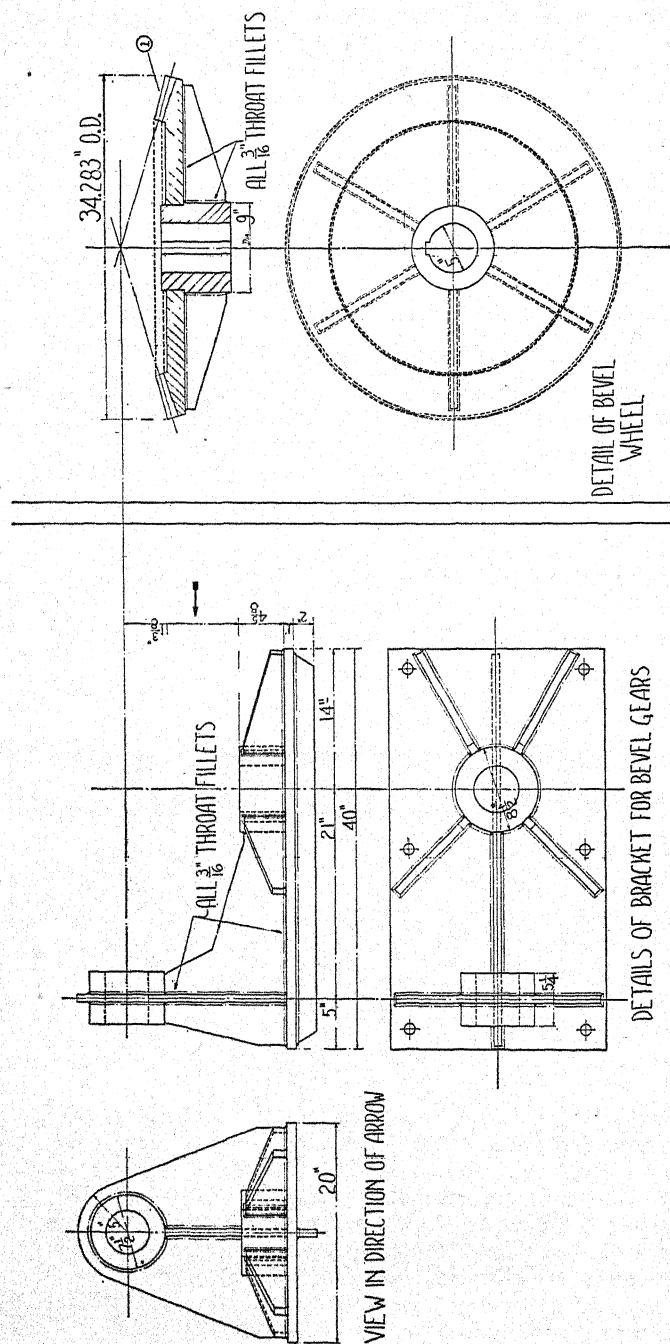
(left) details of bracket carrying bevels. Fig. 9. (right) bevel wheel.
